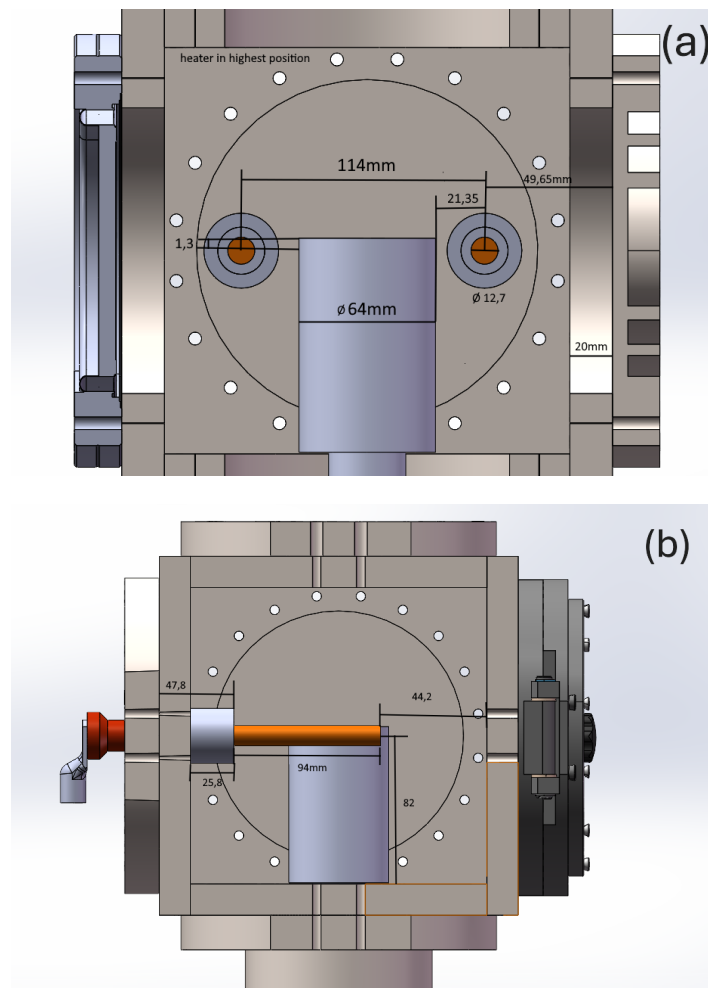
Reactor dimensions. (a) shows the front view, (b) the side view.
